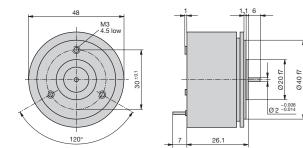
KINAX 3W2 with standard drive shaft at front only, Ø 2 mm, length 6 mm.
